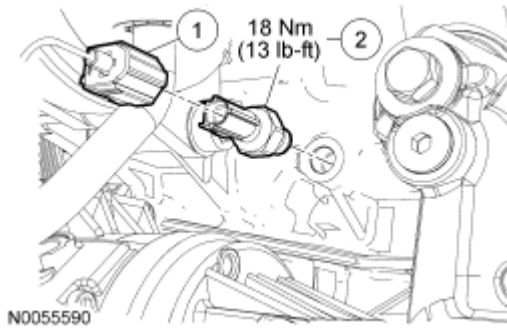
Exploded View Of Engine Oil Pressure (EOP) Switch With Torque Specification
